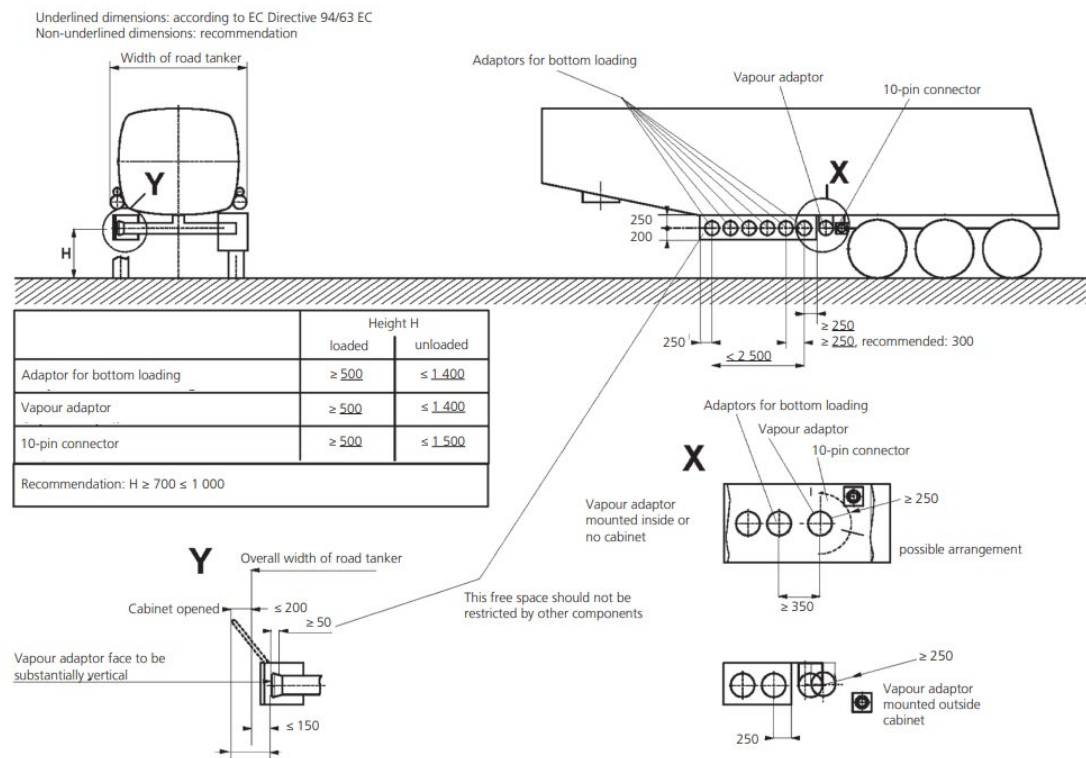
Installation of bottom loading equipment (dimensions in mm)
